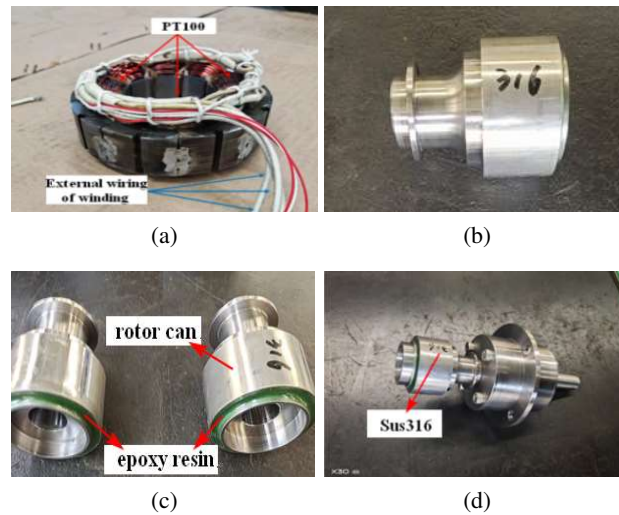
Structure of the stator and rotor of the CPMSM: (a) prototype stator; (b) rotor can with SUS316; (c) epoxy resin filling; (d) prototype rotor
